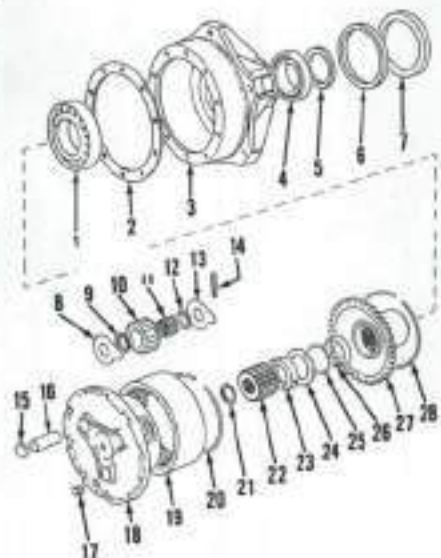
Exploded view of AE3 Carraro front drive axle final drive unit used on 1690 and early 1594 tractors showing component parts and their relative positions.
